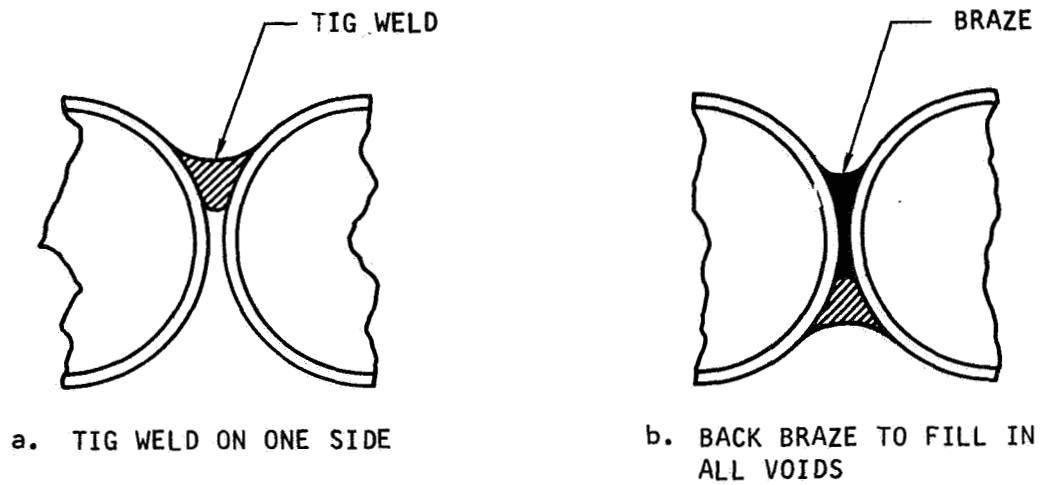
WELDING HEAT EXCHANGER TUBES TO RETURN MANIFOLD
